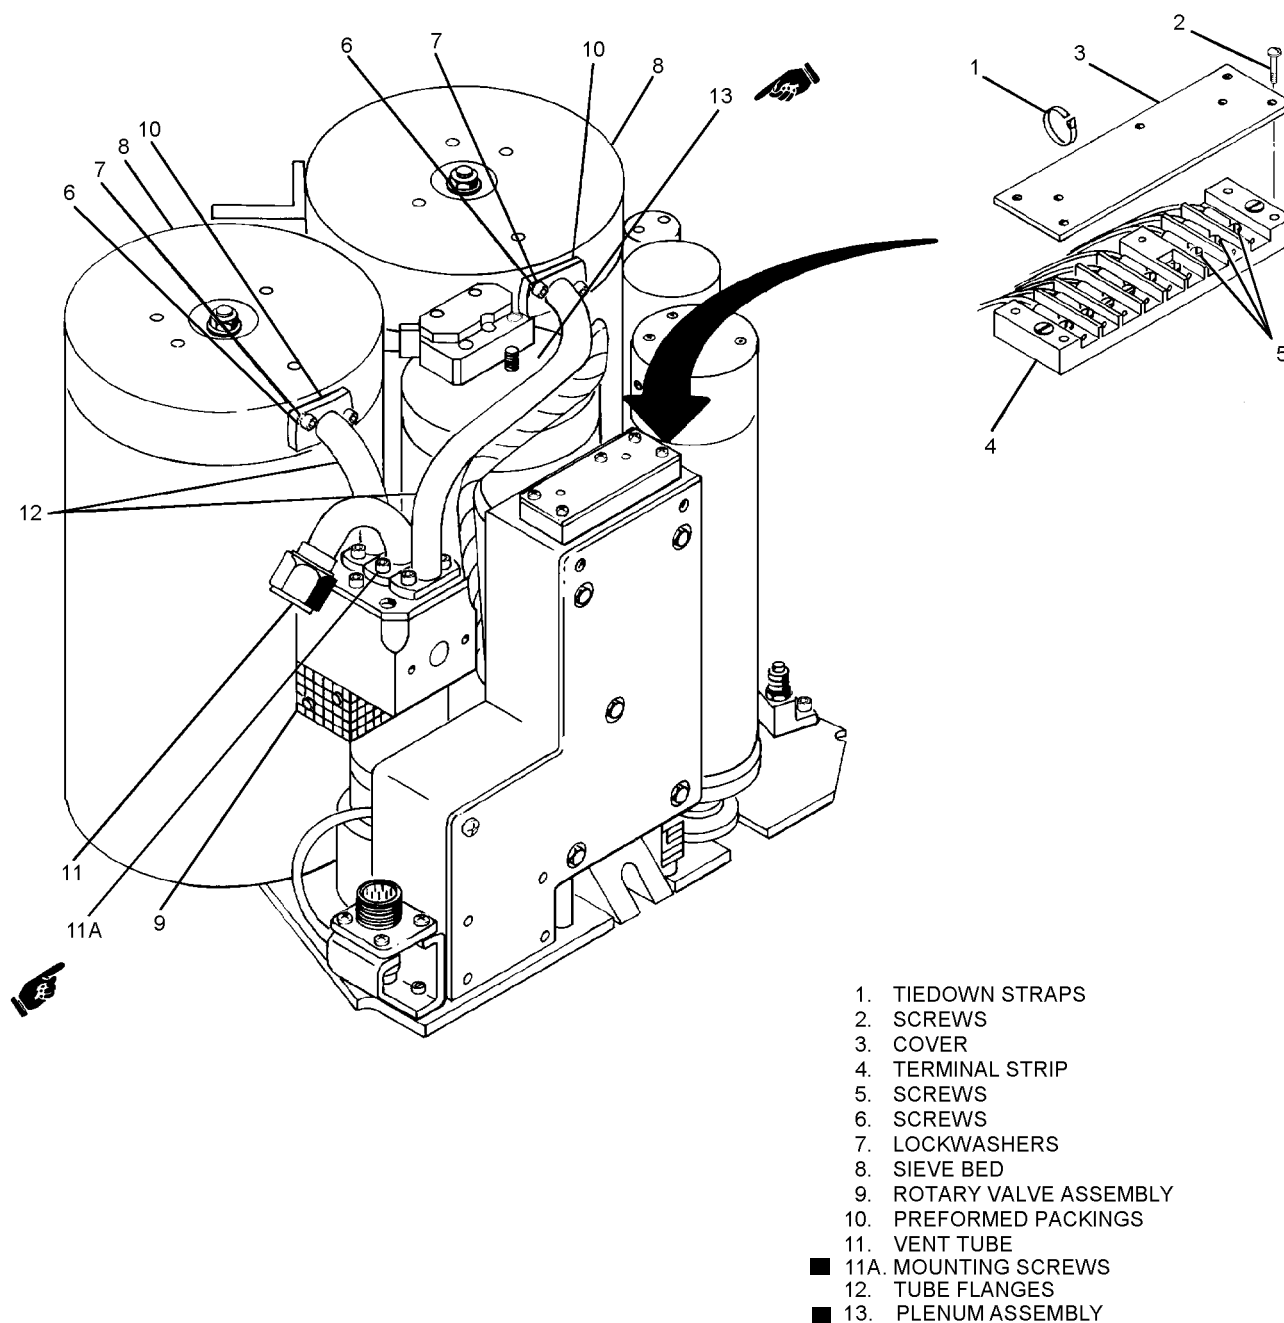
Rotary Valve Assembly Removal/Assembly
